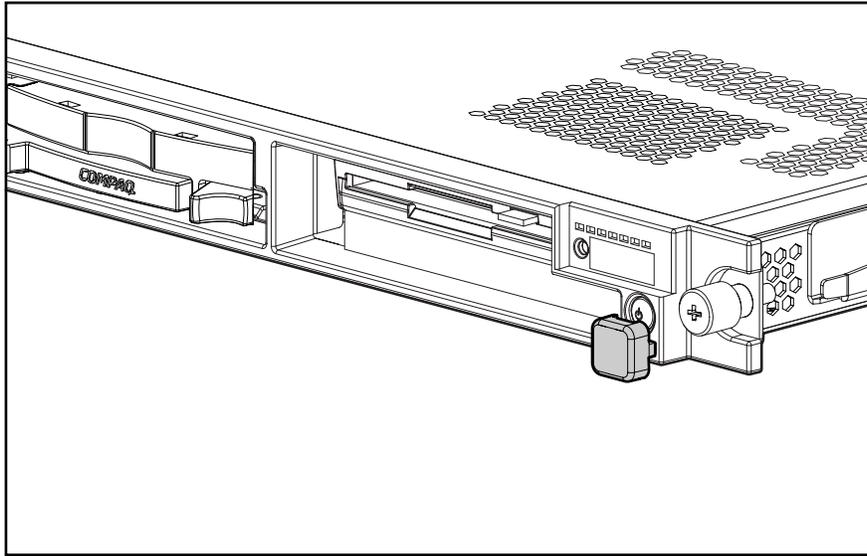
CD-ROM/diskette drive assembly fully seated
